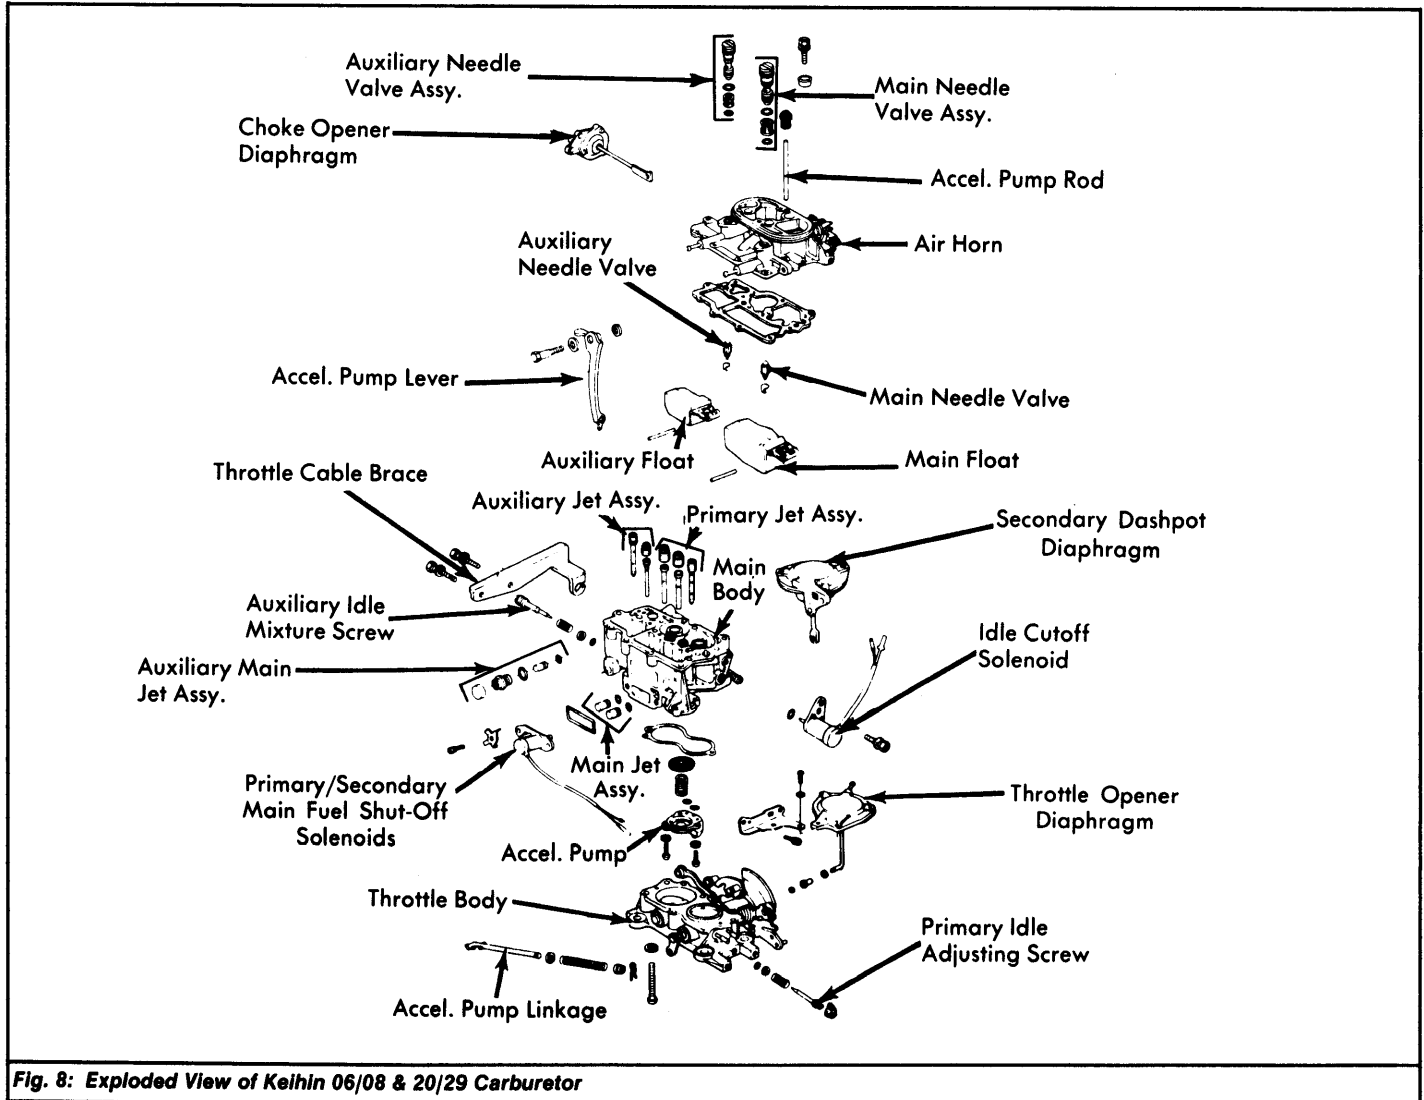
Exploded View of Keihin 06/08 & 20/29 Carburetor
